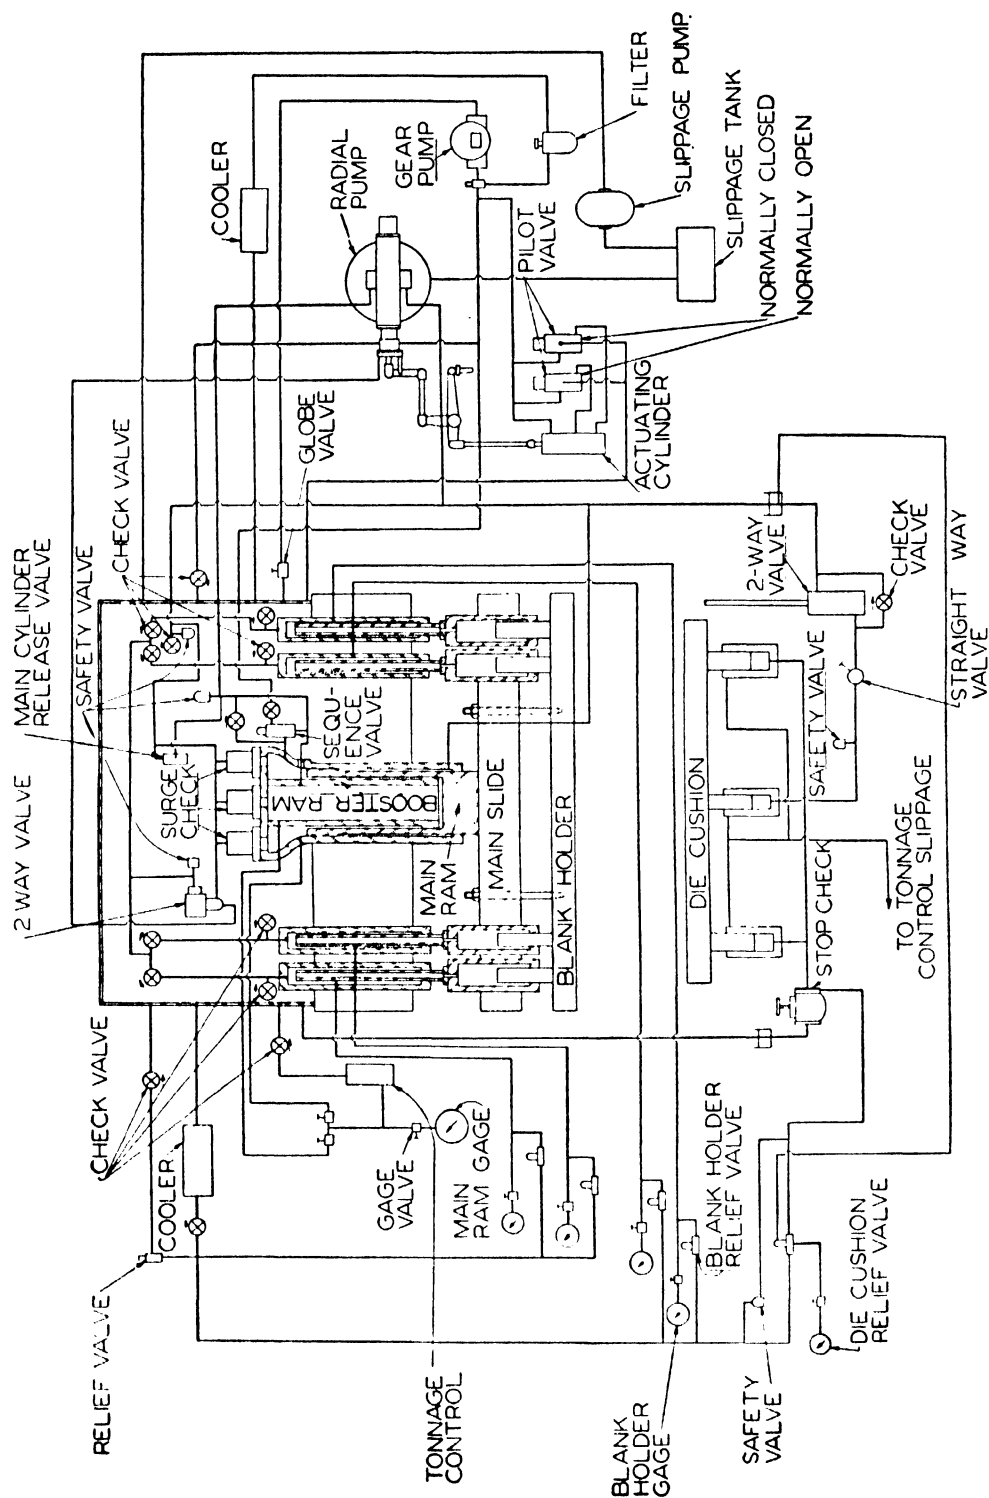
Hydraulic circuit of triple-acting hydraulic draw press. (The Hydraulic Press Mfg. Co., Mount Gilead, Ohio.)
